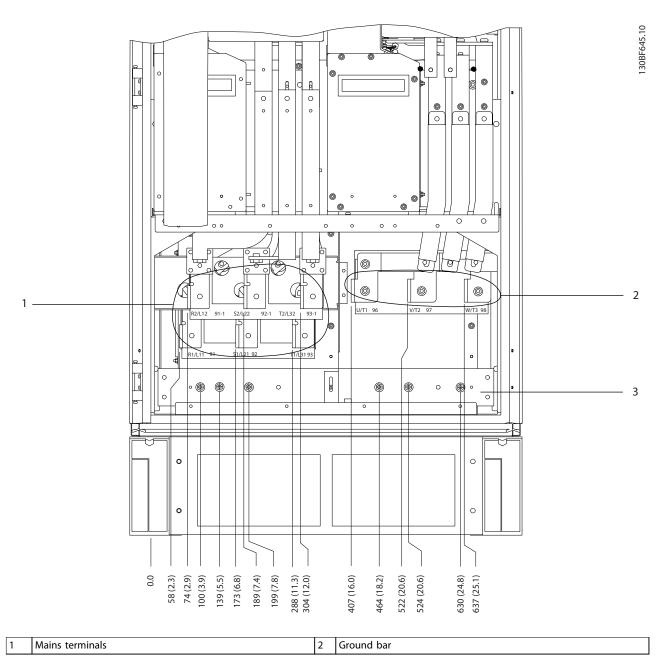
Terminal Dimensions for F10-F13 Rectifier Cabinet, Front View
